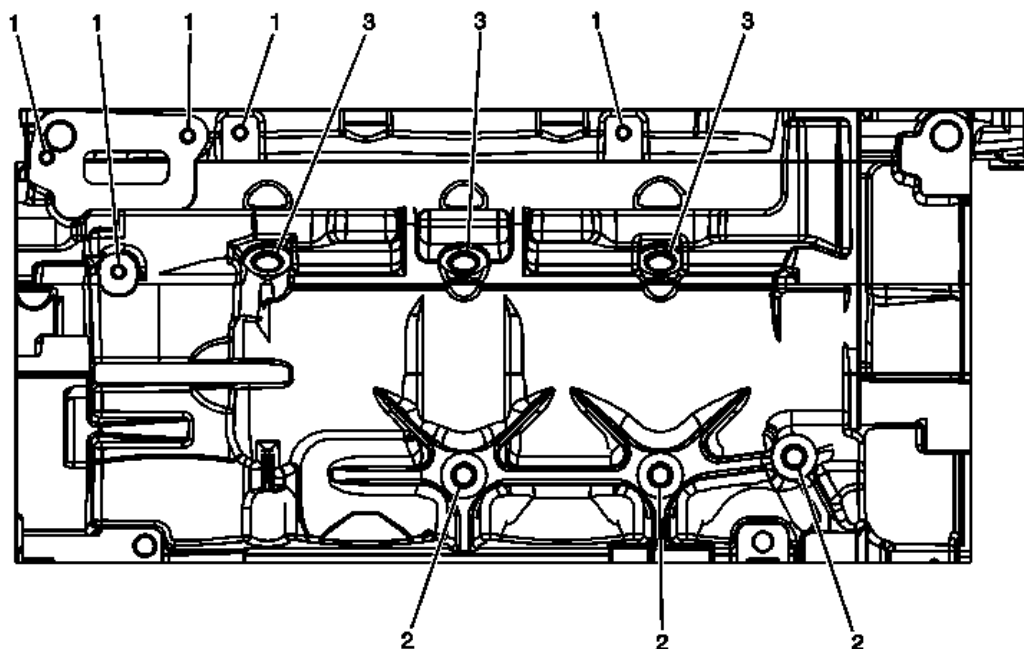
Identifying Bolt Size & Locations On Engine Block - Back View
